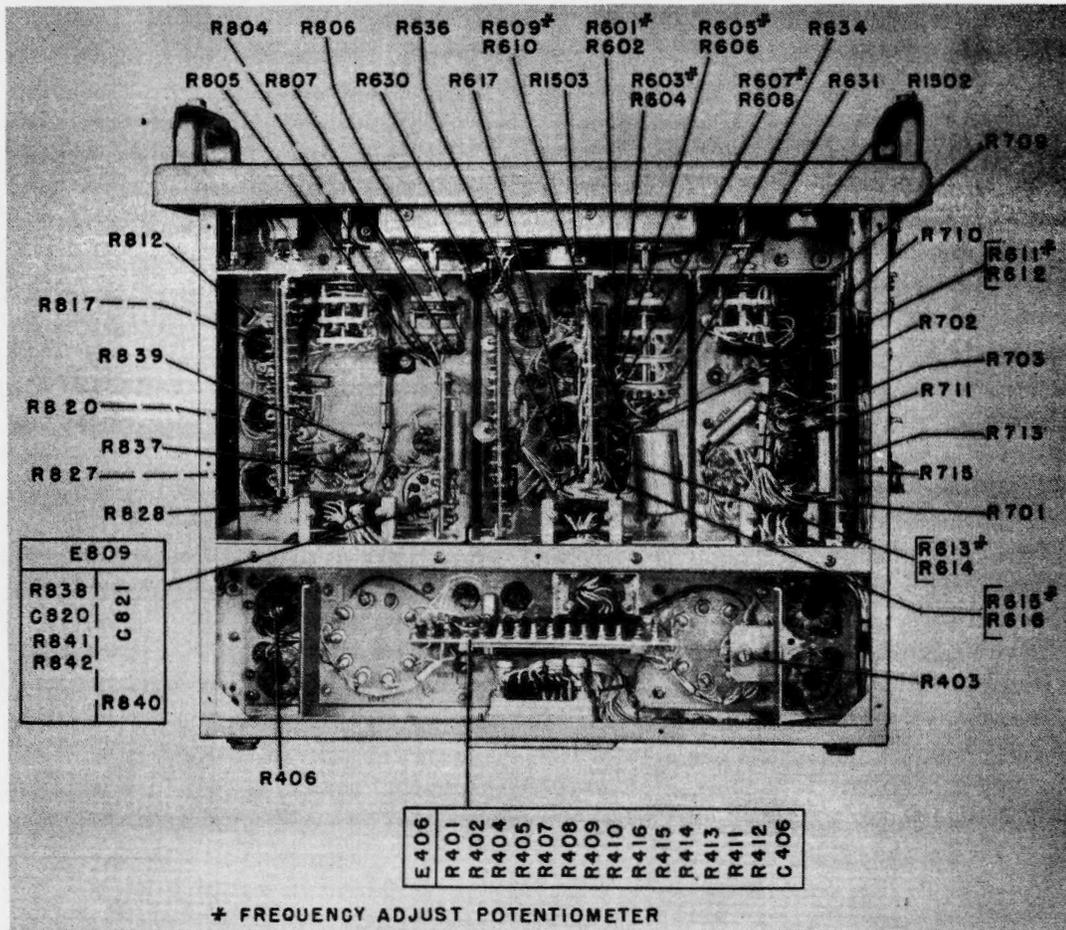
Comparator Keyer Component Location, Bottom View, Sheet 2
